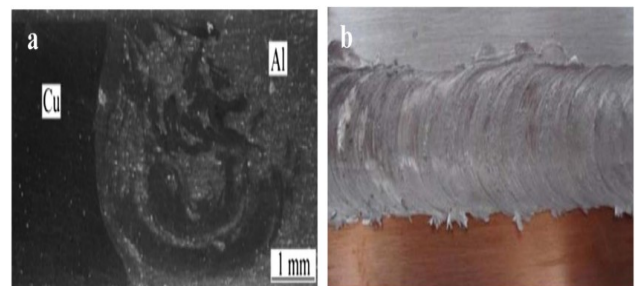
(a) Macroscopic view of an Al-Cu joint without intermetallic compounds and (b) surface appearance of the joint [32]
